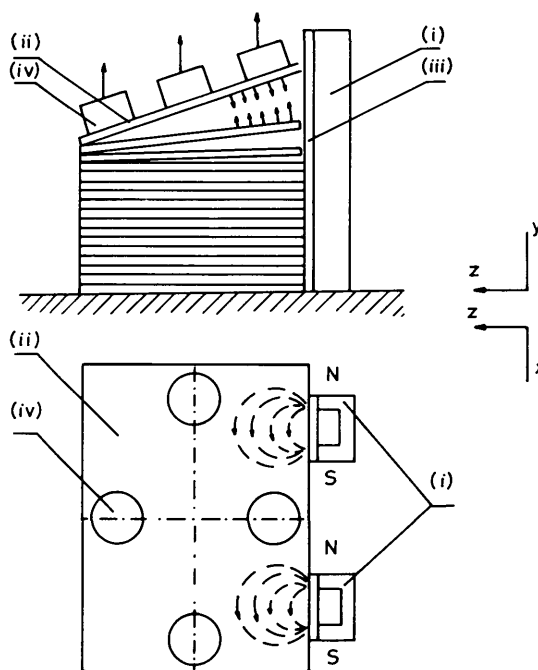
Principle of operation of a machine which separates steel sheets magnetically
